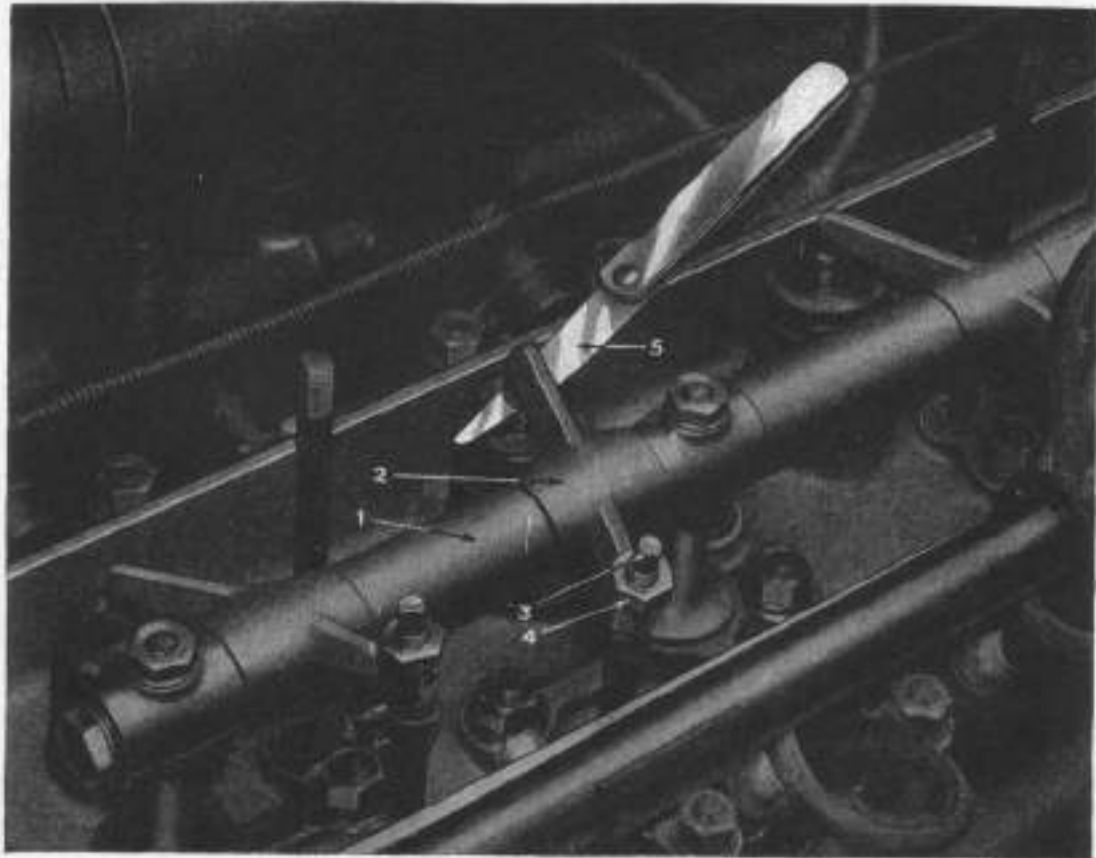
ADJUSTING THE INLET VALVE ROCKER CLEARANCES.
